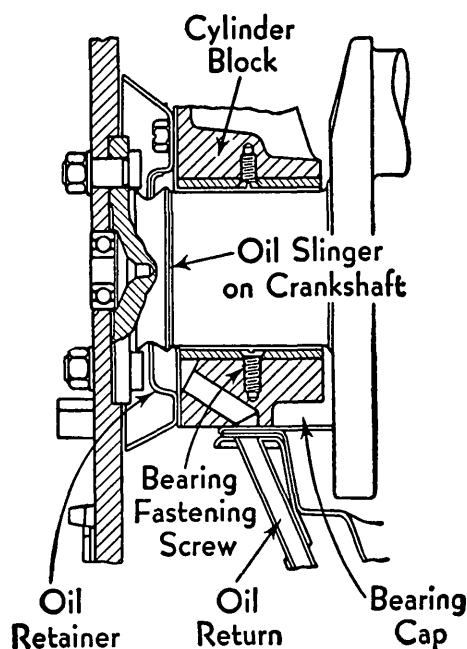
R or main bearing oil seal, 1935-52 (Except 1948-52 Six)
